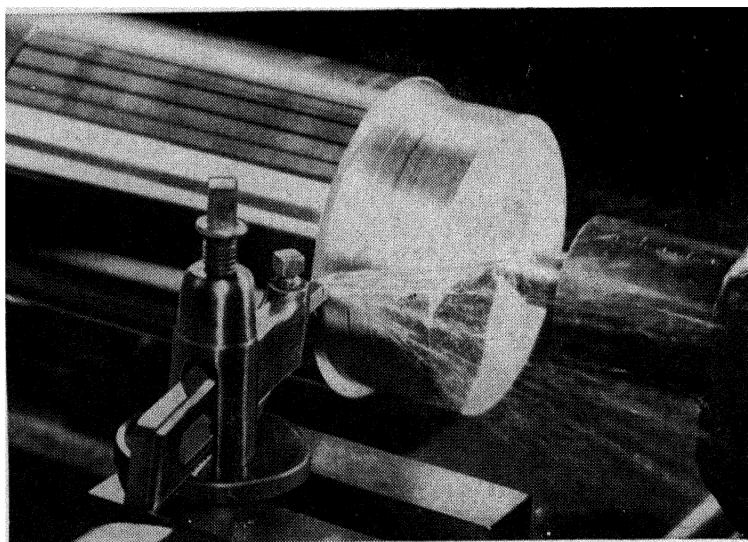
Cutting magnesium on a lathe. Magnesium is the easiest of all metals to machine. Heavy feeds and depths of cut can be used at high speeds. (The Dow Chemical Company.)
